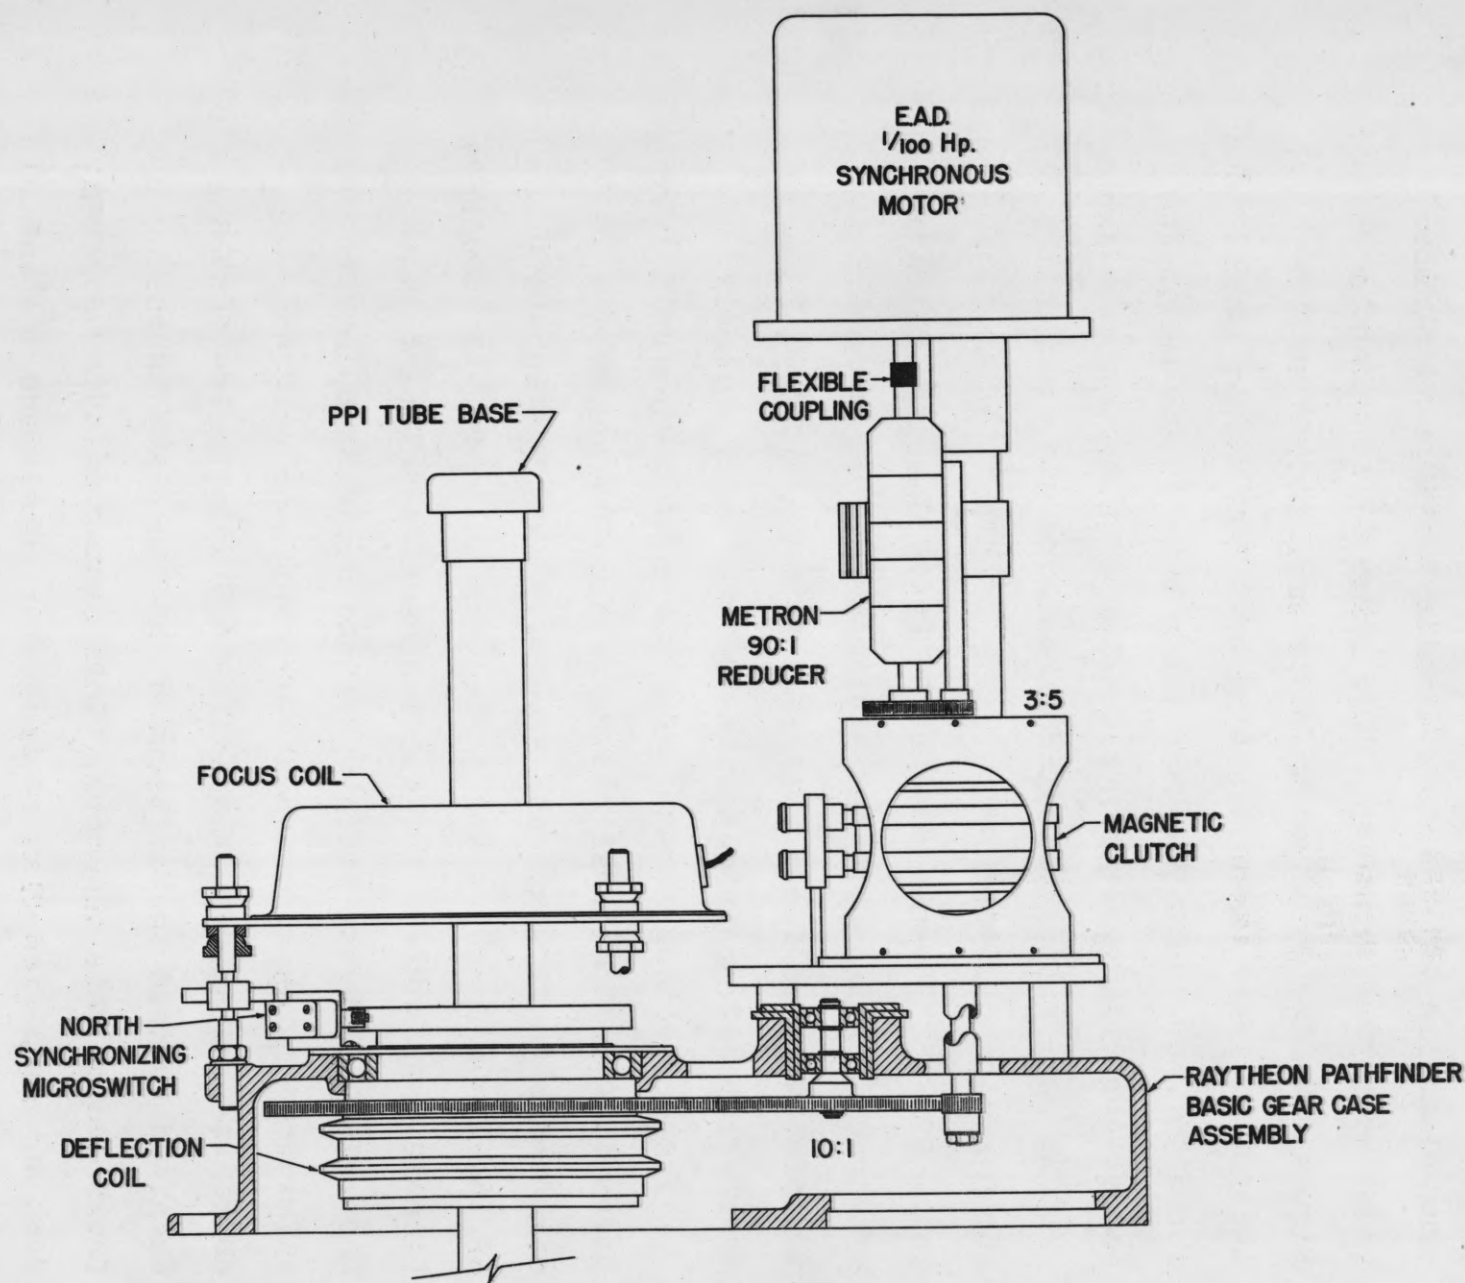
DEFLECTION AND DRIVE ASSEMBLY FOR LWRU MINK UNIT
